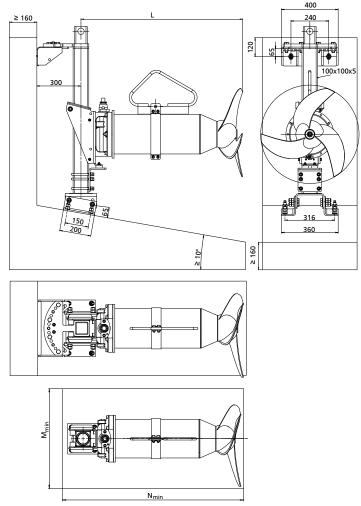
Installation with accessories 22 - Amamix 400 (size 4135 only) / 600
